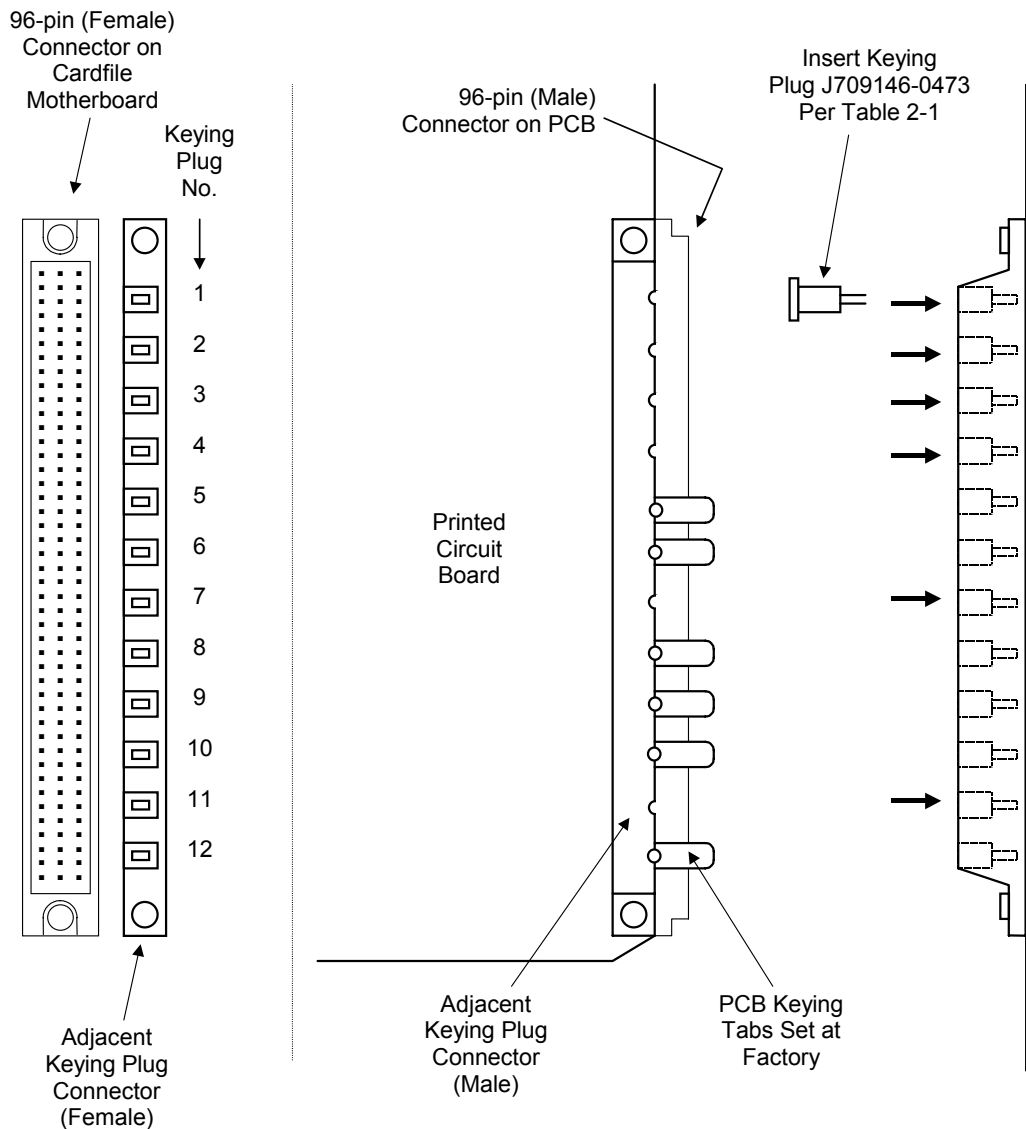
Cardfile PCB and Panel Installation Guidelines
